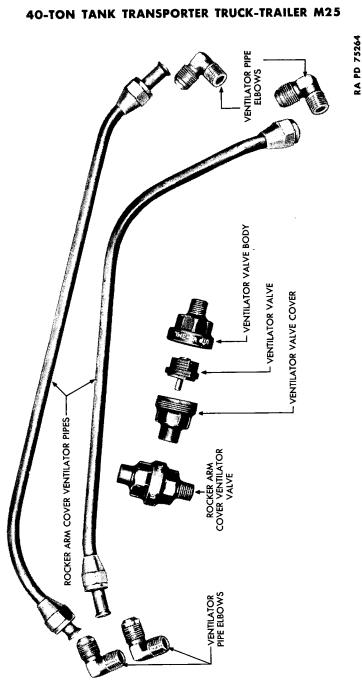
Rocker Arm Cover Ventilators—Disassembled
